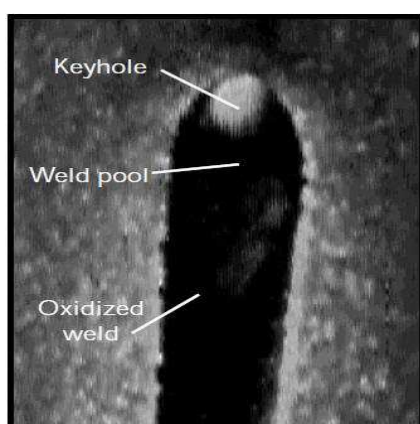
Simultaneous imaging of weld pool and keyhole[1]
